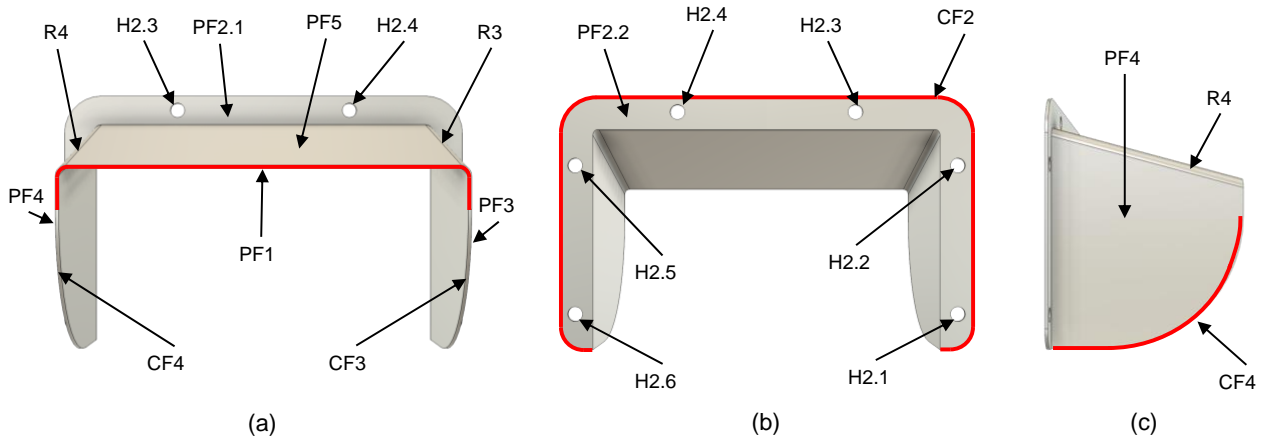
Manufacturing features in front (a), rear (b) and left side (c) views
